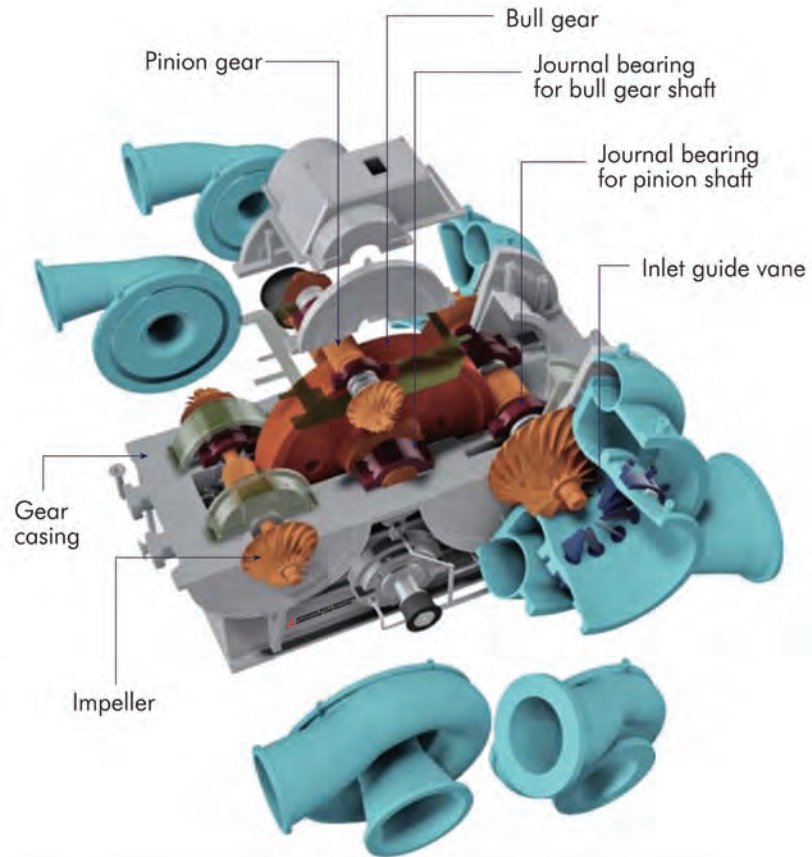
Example of 6-stage integrally geared compressor [39].
